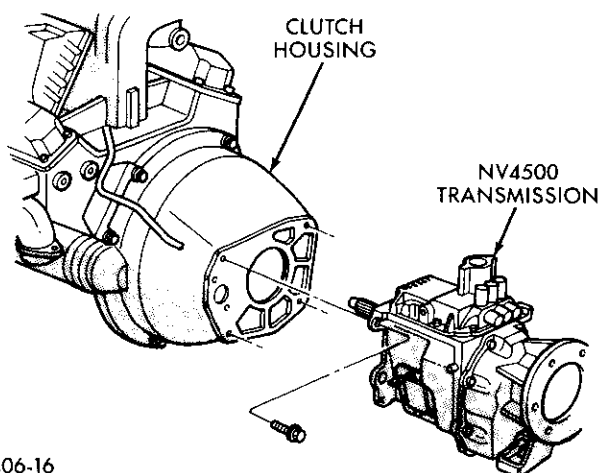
Clutch Housing/Transmission Installation—Diesel Engine
